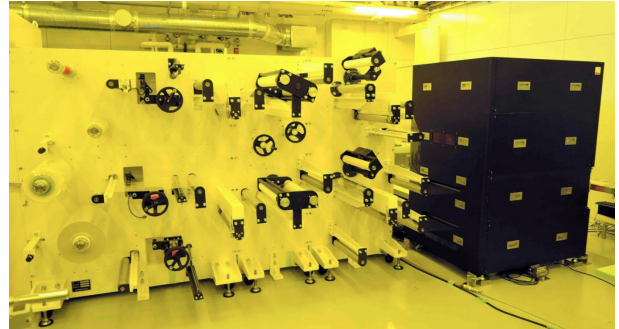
Photograph of the developed direct drawing exposure device and transfer unit
